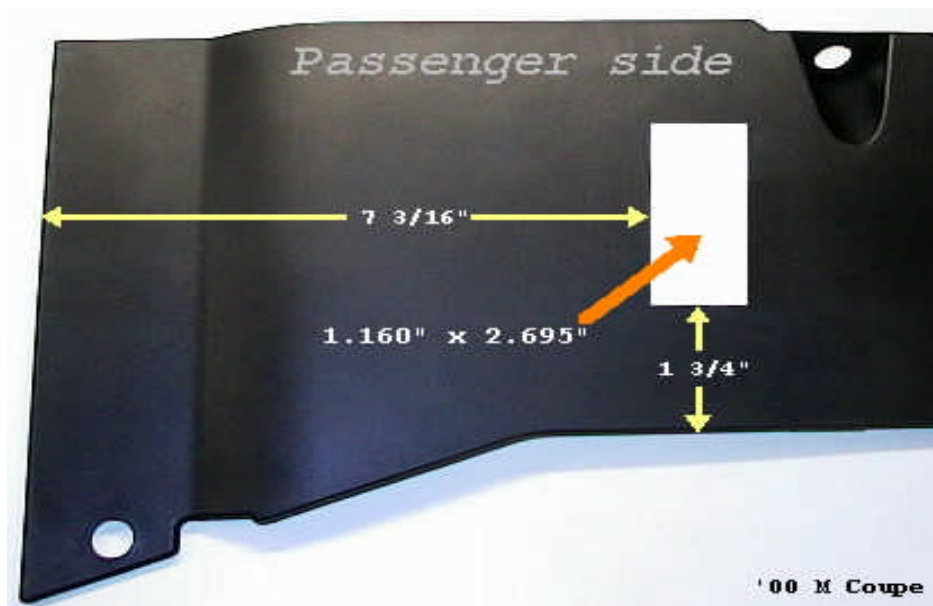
Figure X. Cutout location for light. Looking at finished side of passenger's footwell panel.
